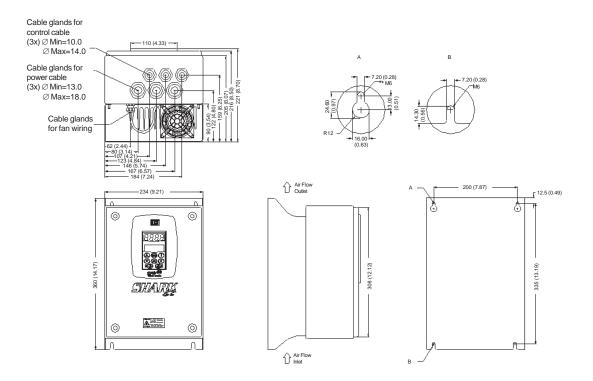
Mechanical data - Size 1, Dimensions mm (in)
